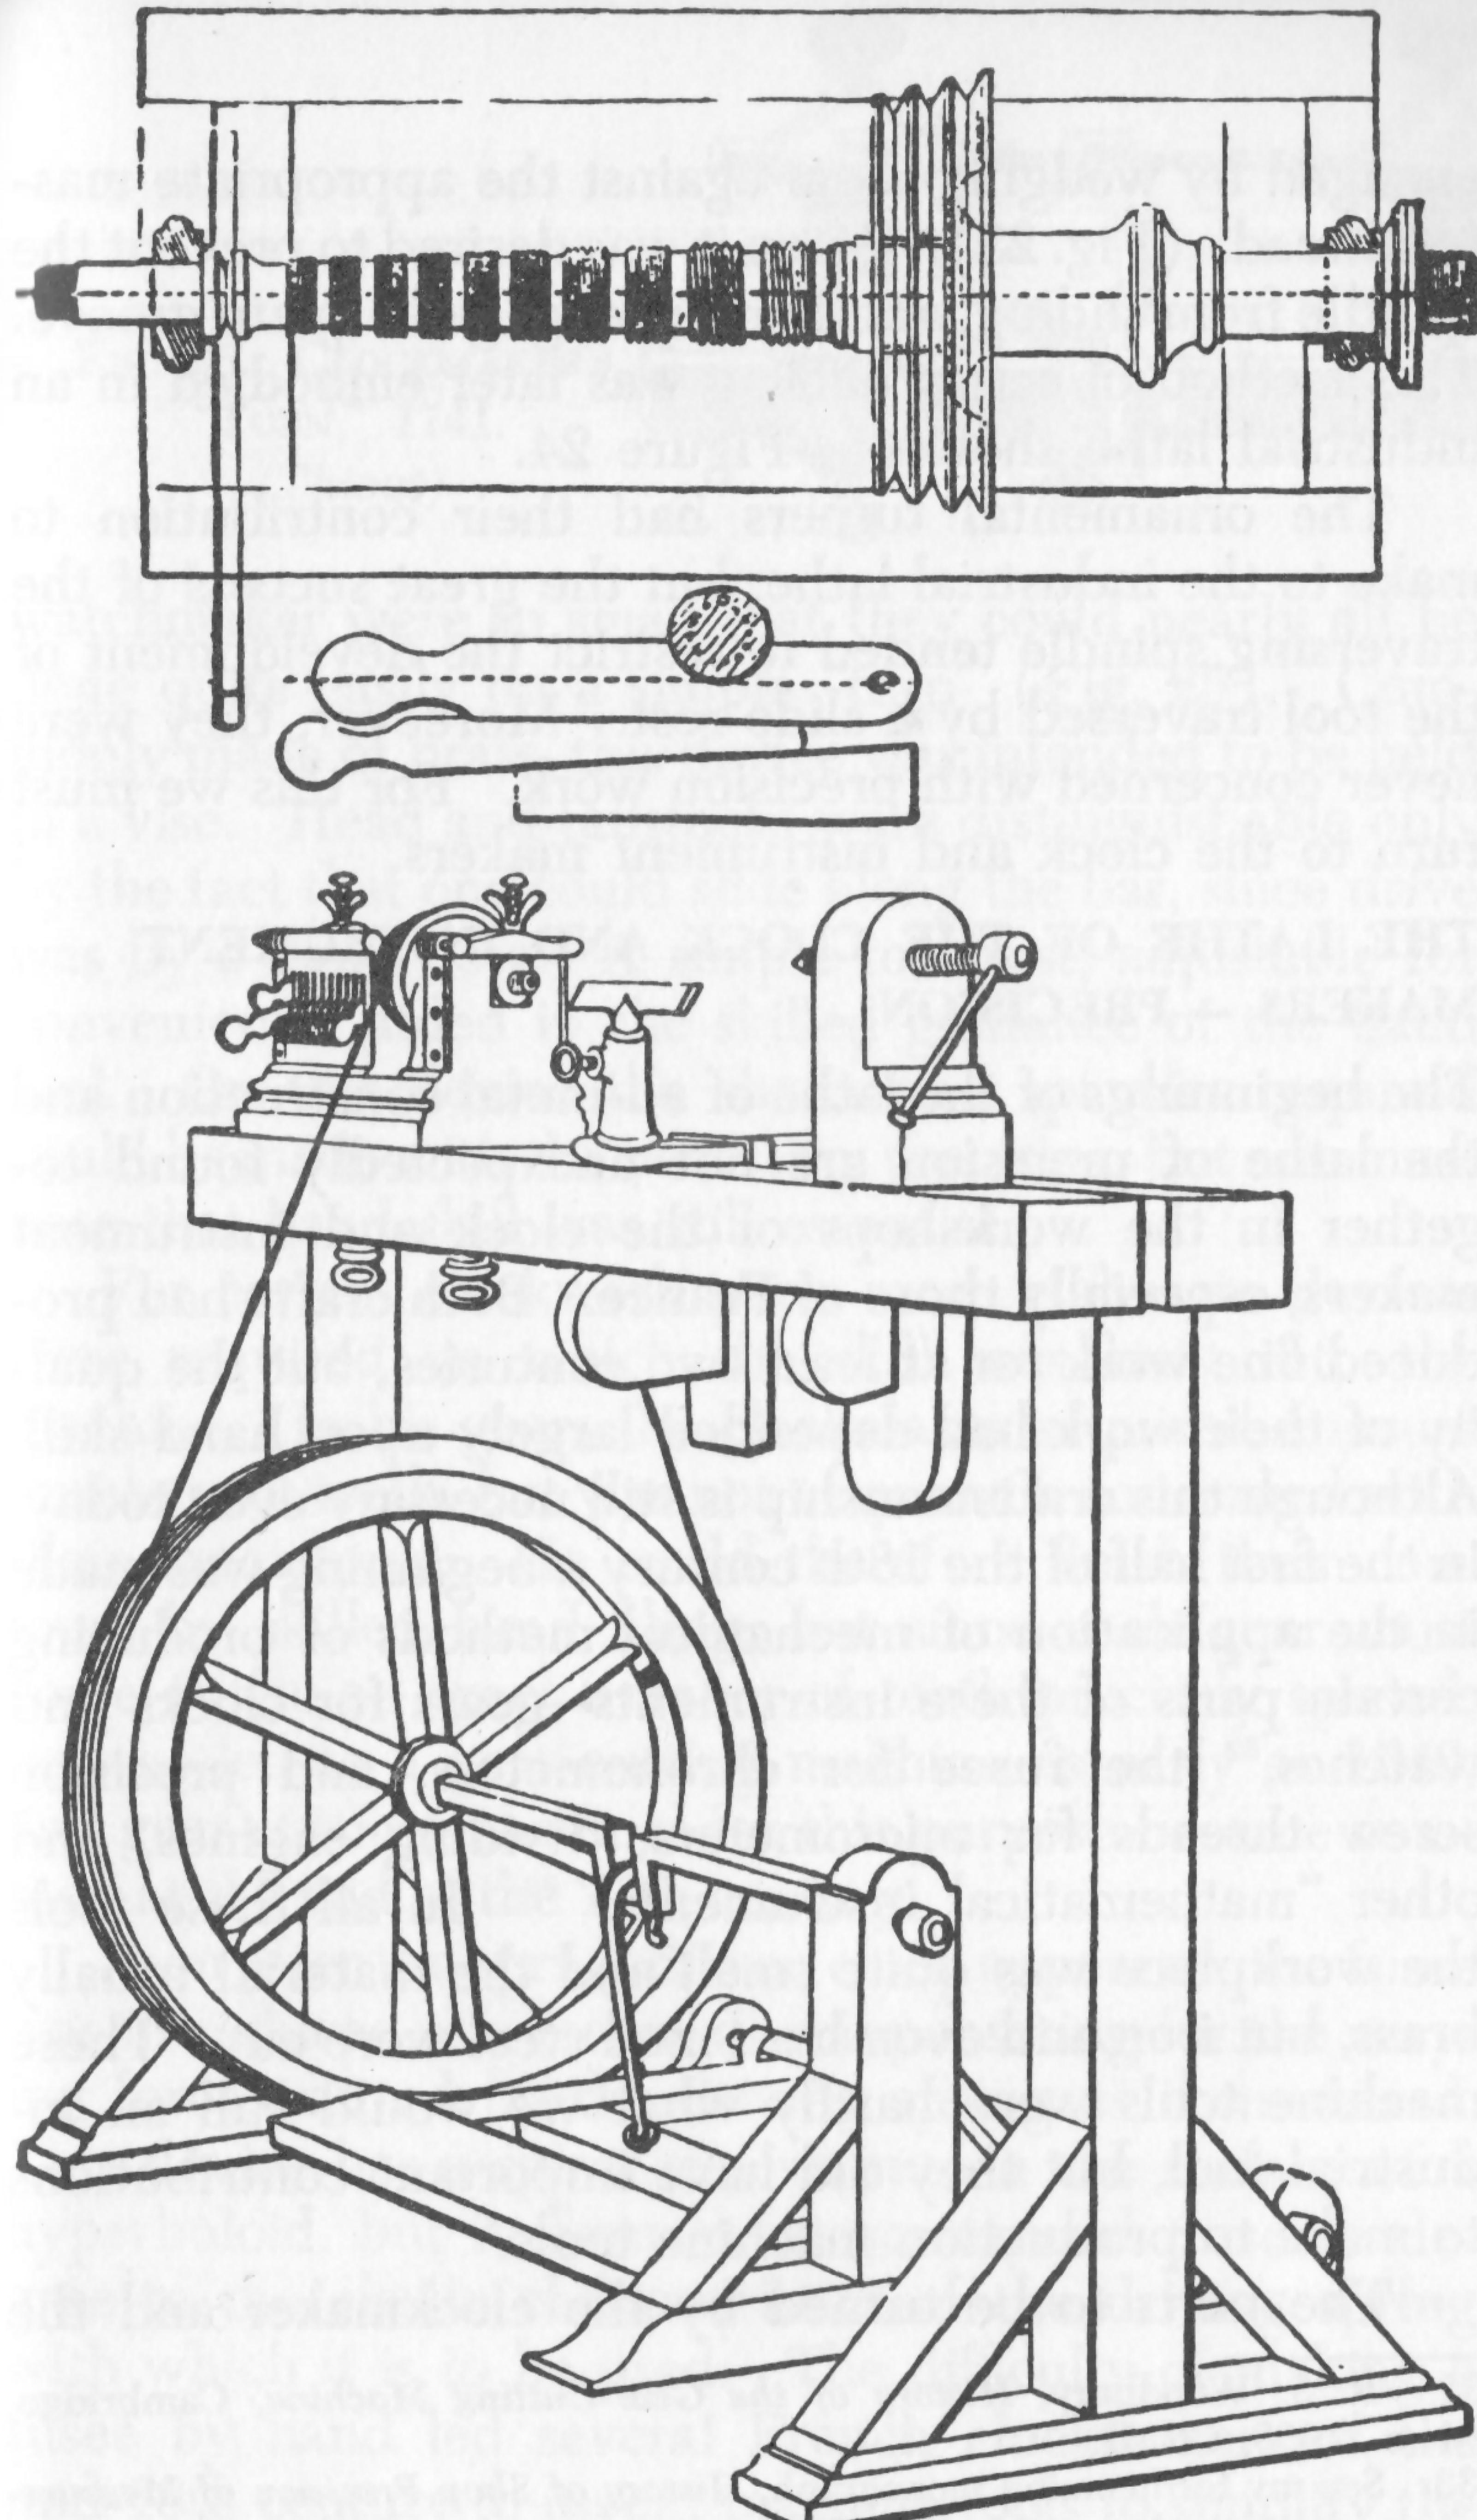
INDUSTRIAL SCREW-CUTTING LATHE OF 1785.
